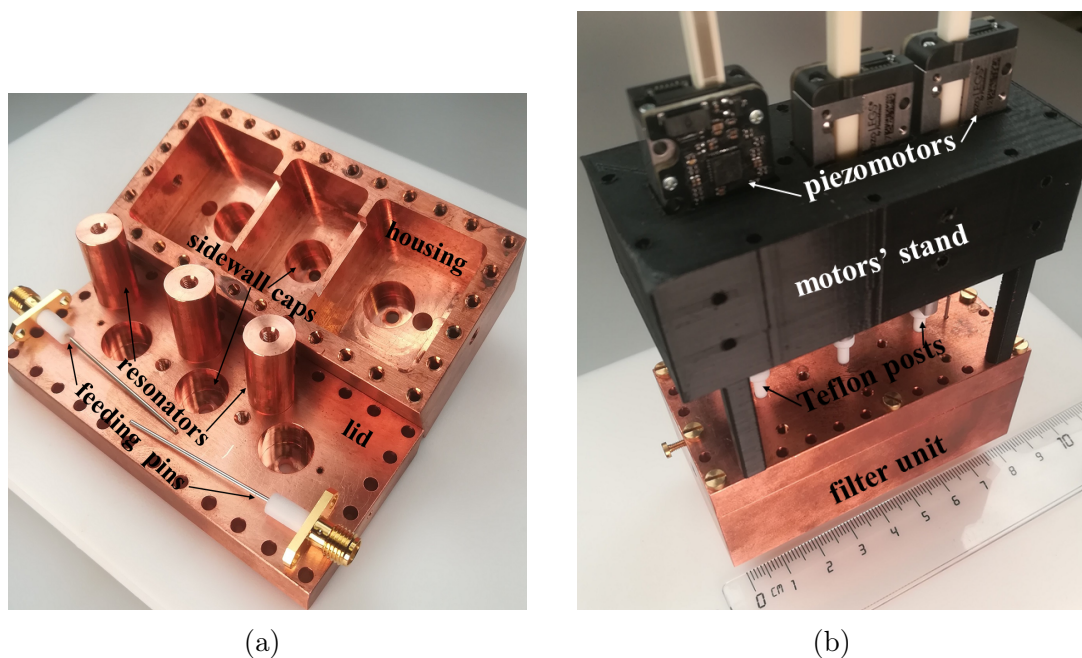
The fabricated four-pole tunable inset filter. (a) Disassembled, and (b) assembled.
